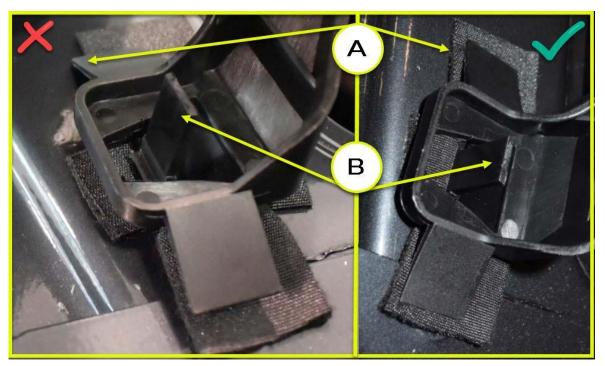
Ensure the locking tab of the mounting bracket is fully locked by pushing it forward (B). Make sure all mounting surfaces are covered with the adhesive tape (A).
